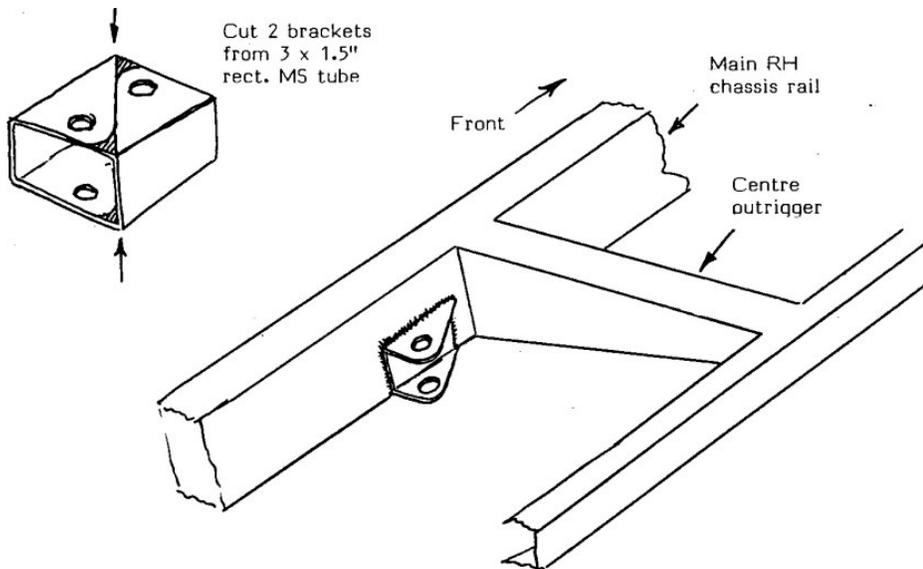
Fitting brackets to chassis for radius rods – forward end.
